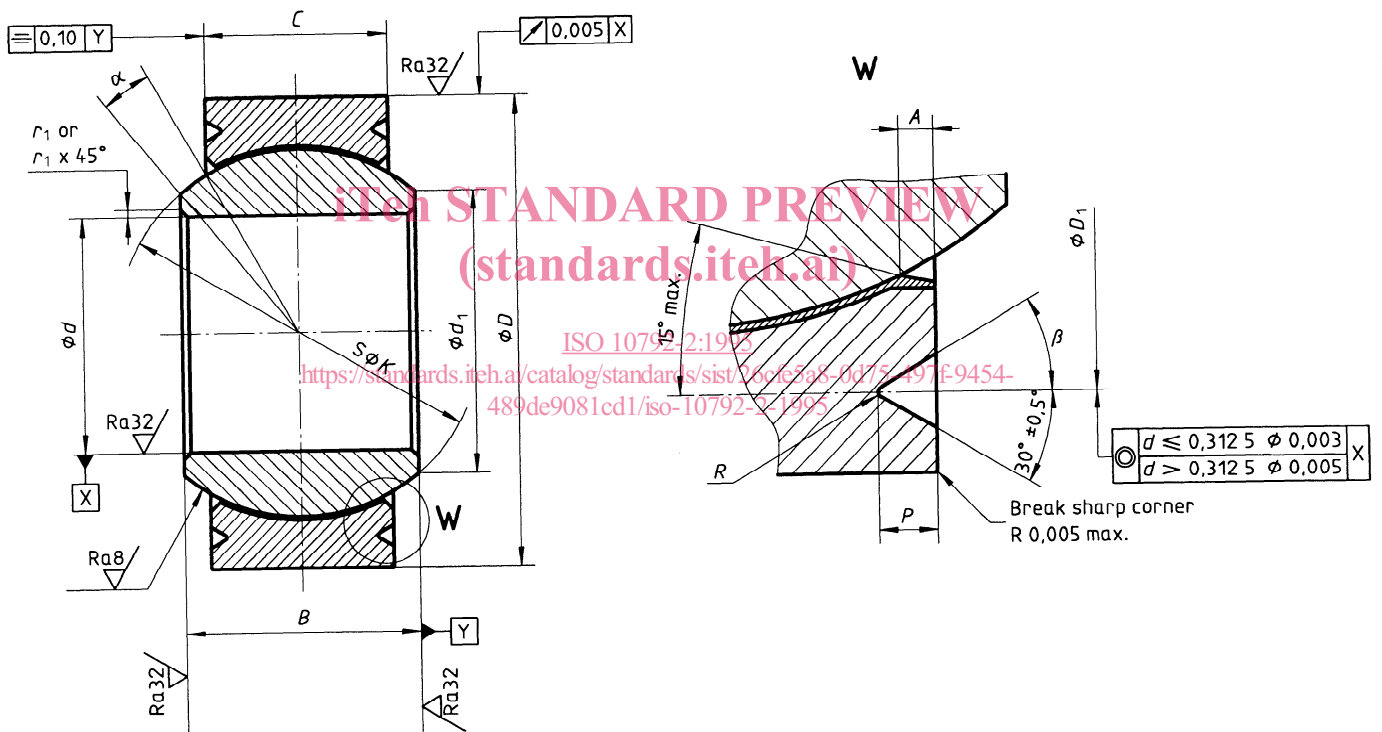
Spherical plain bearing with self-lubricating liner with face groove
